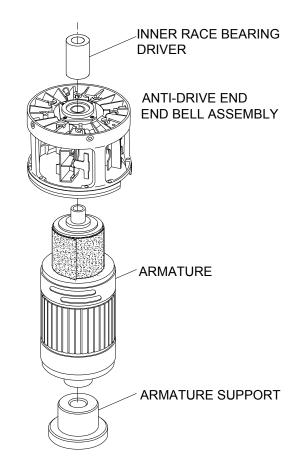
Pressing Bearing and Brush Support onto the Armature
